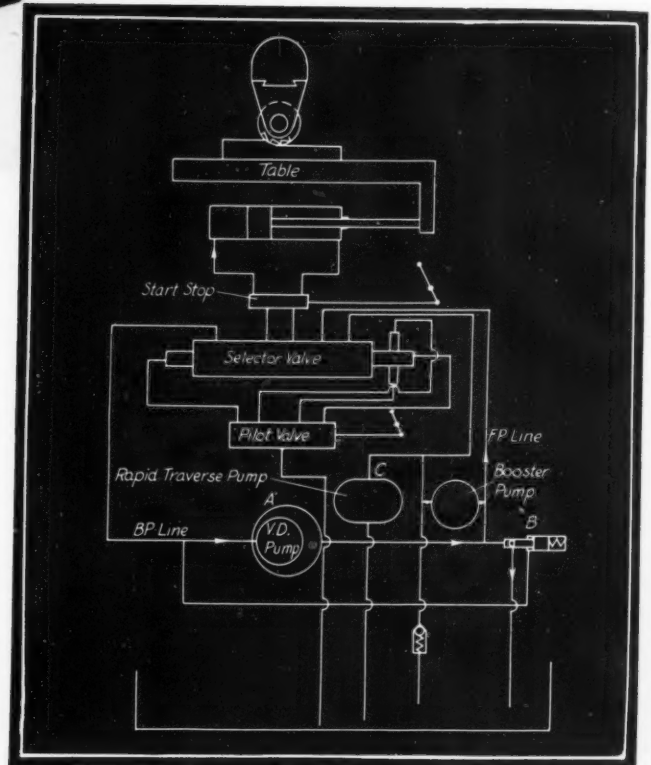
Top left—Hydraulic unit is located at left of hydromatic bed type milling machine and clearly shows feed rate control lever. Fig. 2—Above—Locked hydraulic circuit, where rate of table movement is controlled by metering oil leaving low pressure end of cylinder through variable delivery pump, locking piston between pressures
